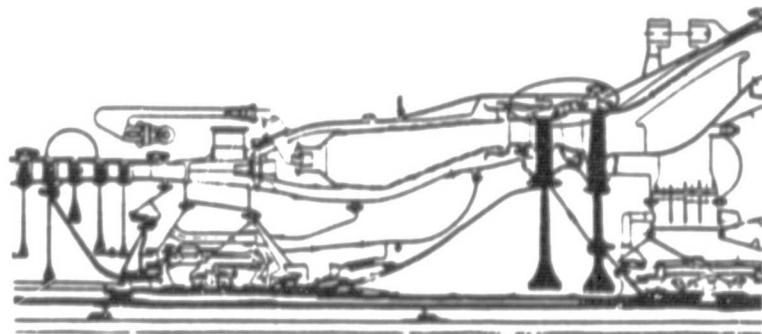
Stage 2 HP Turbine Nozzle Assembly.
